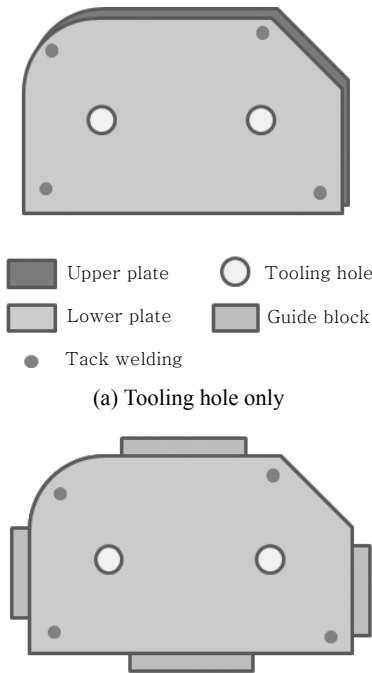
Additional guide blocks on welding jig to prevent unmatched edge
